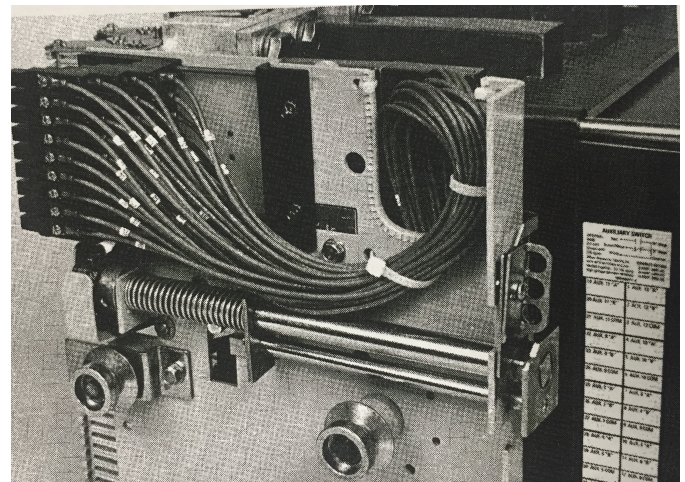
Routing of the secondary disconnect wires on a small-frame draw-out breaker and installing the secondary disconnect plug.
